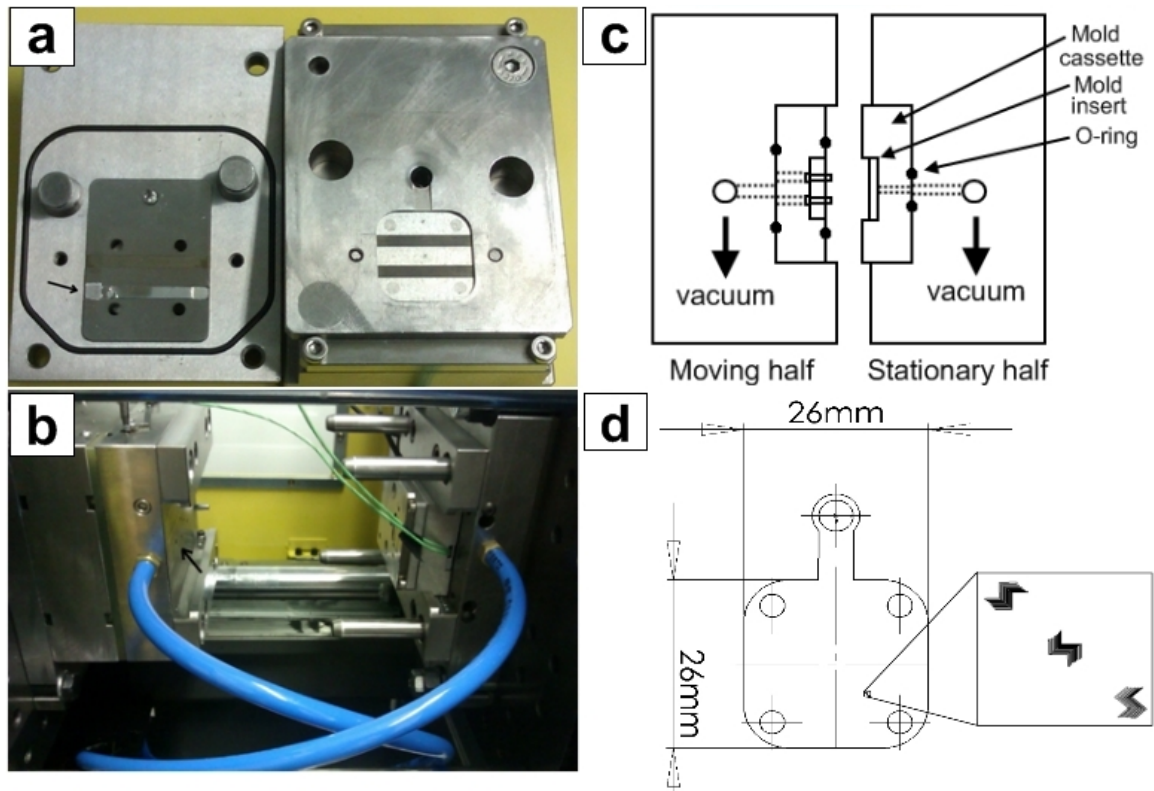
(a) Cassette mold showing AAO mold template (arrow, left) and BMG mold strips (right); (b) cassette mold connected to vacuum pump; (c) illustration of mold cross-section; (d) sample shape (front view) and feature location for quantitative analysis.
